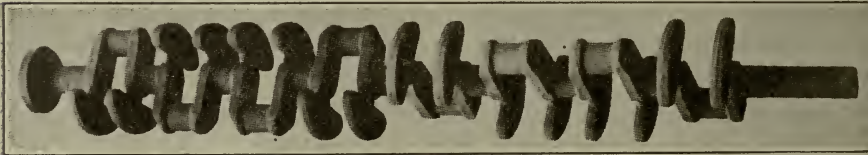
Nine Bearing, Eight Throw, Counterbalanced Crank Shaft.
